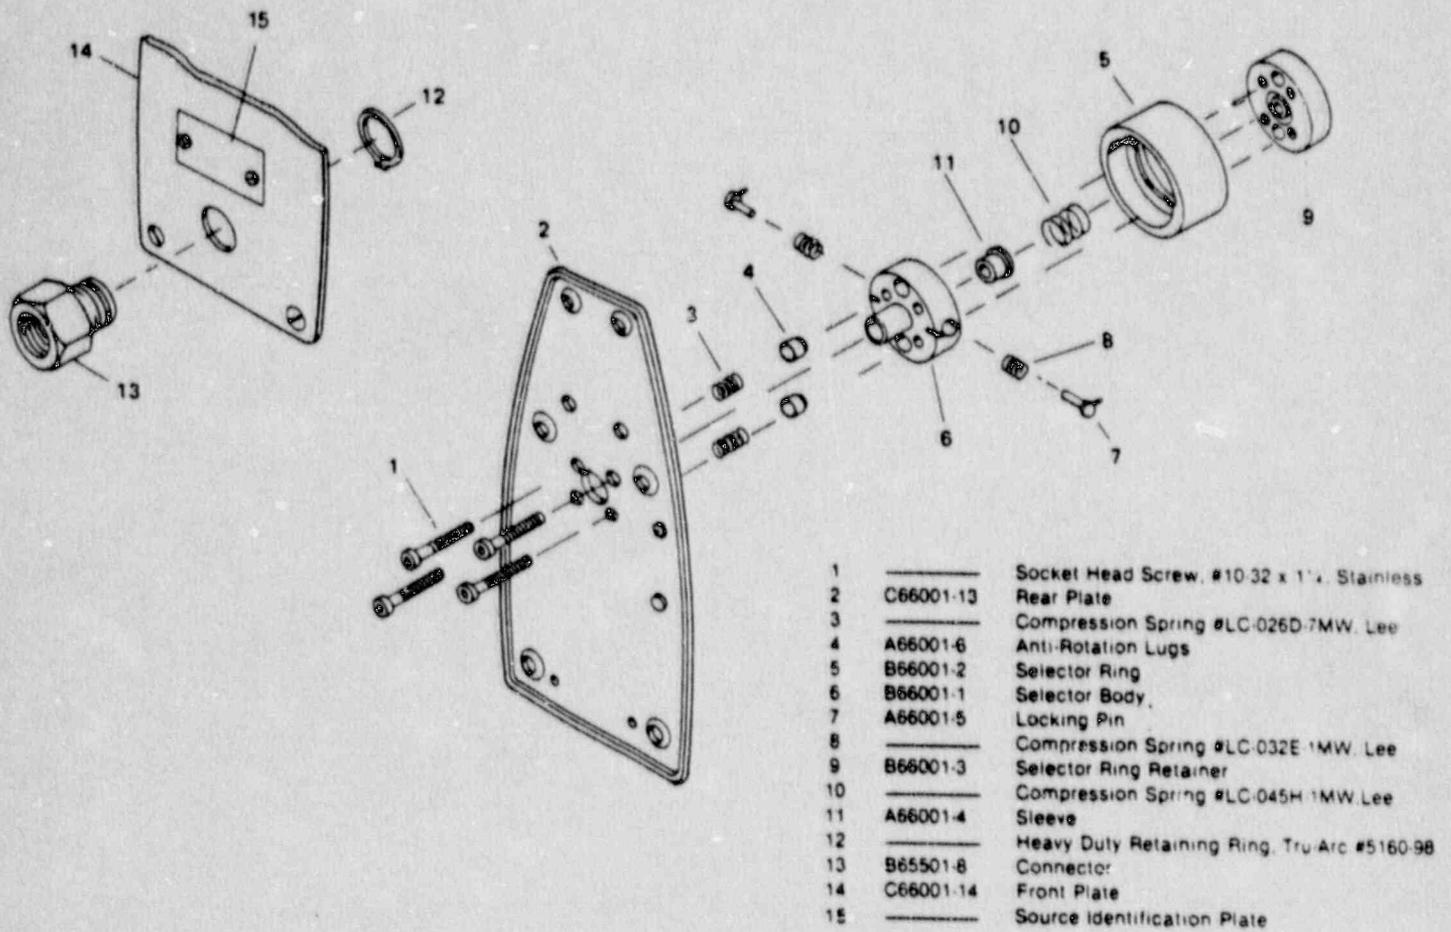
Rear End Plate and Control Unit Connector—Exploded View
